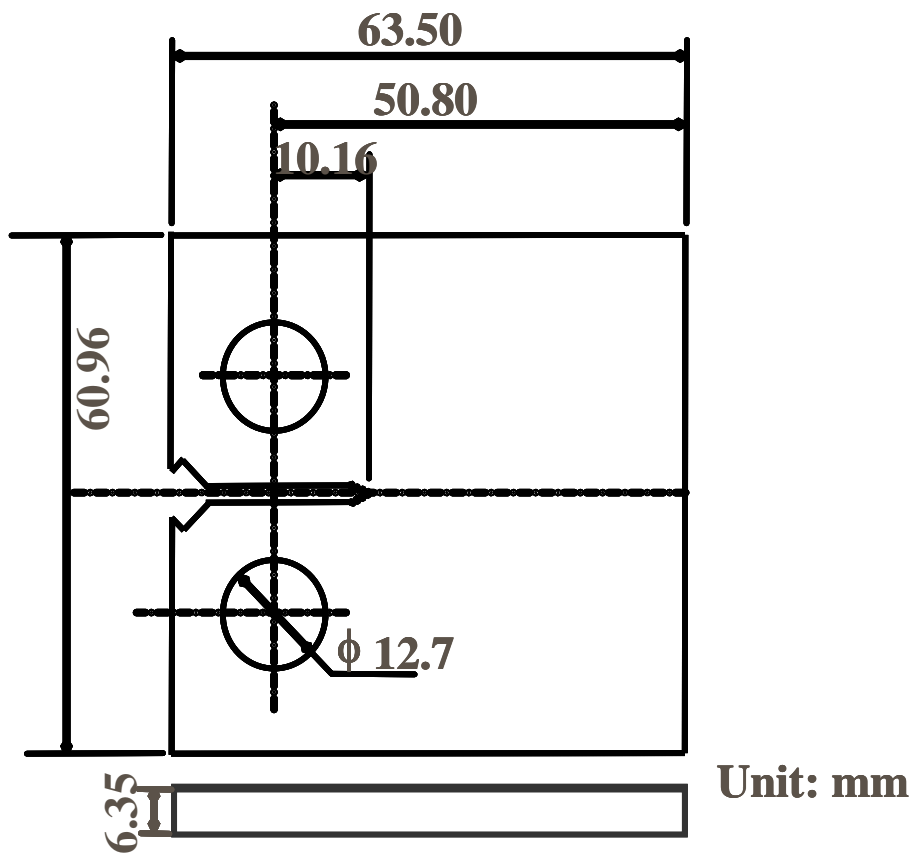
Compact-tension specimen of Type 316 LN stainless steel with a thickness of 6.35 mm, a notch length of 10.16 mm, and a crack length of 22.86 mm.
